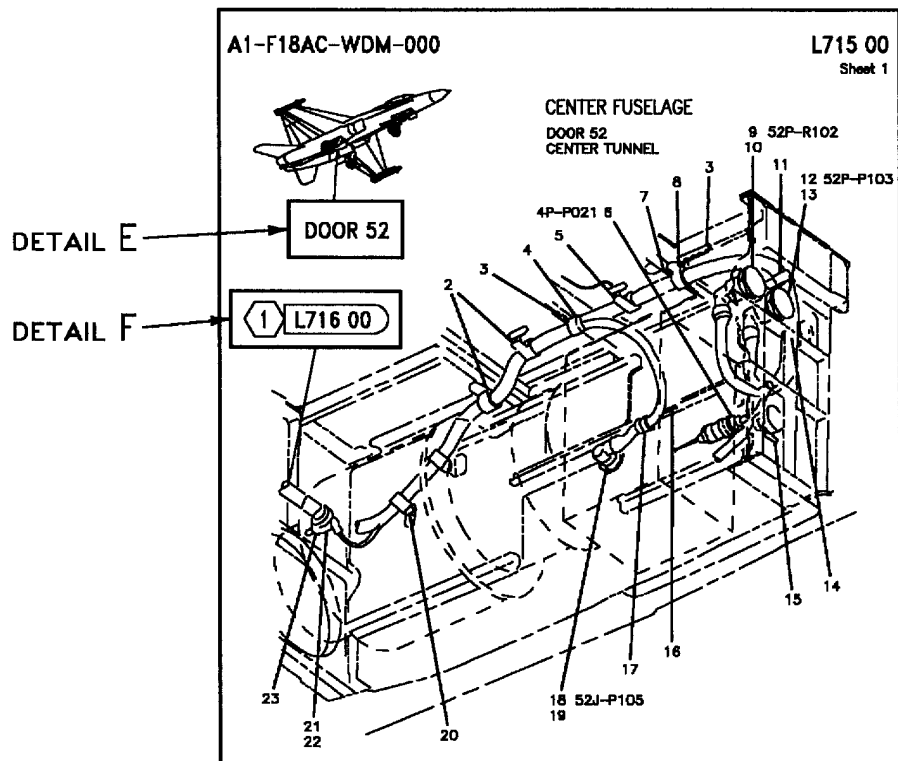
Installation and Removal of Cable Assemblies (Sheet 2)
